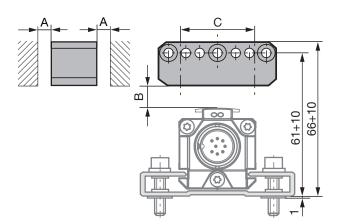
Dimensions and distances with BTL5-P-5500-2 magnet
